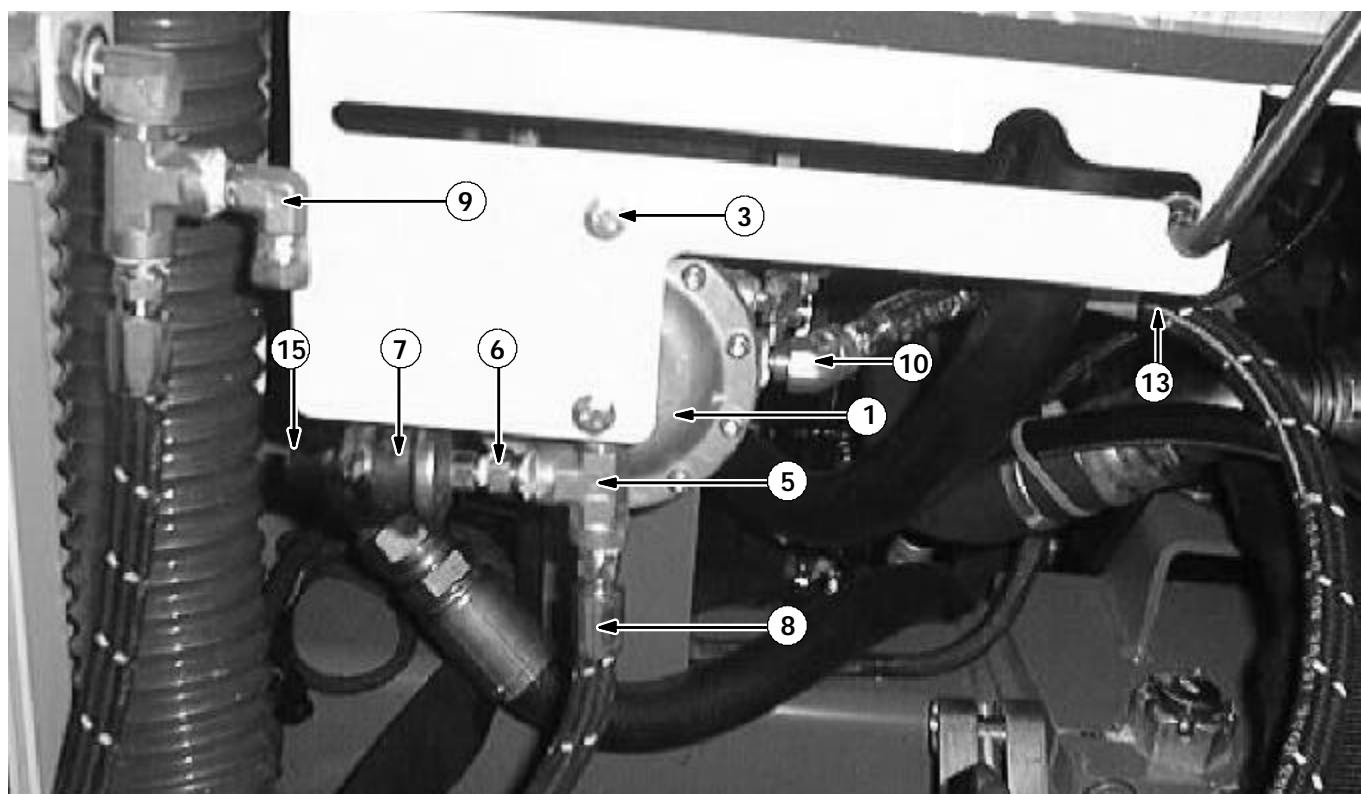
NEW FUELOCKOFF FILTER INSTALLATION
